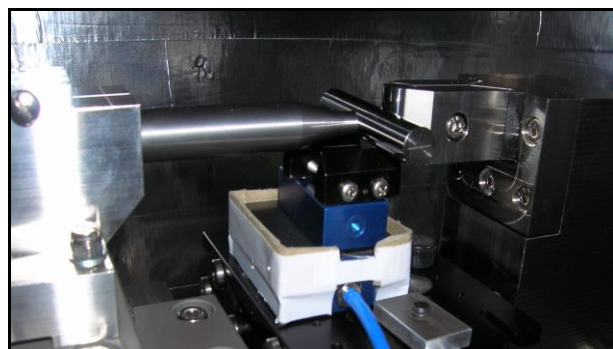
Micrometer measuring a cylinder mounted on a frictionless air pad assembly.
